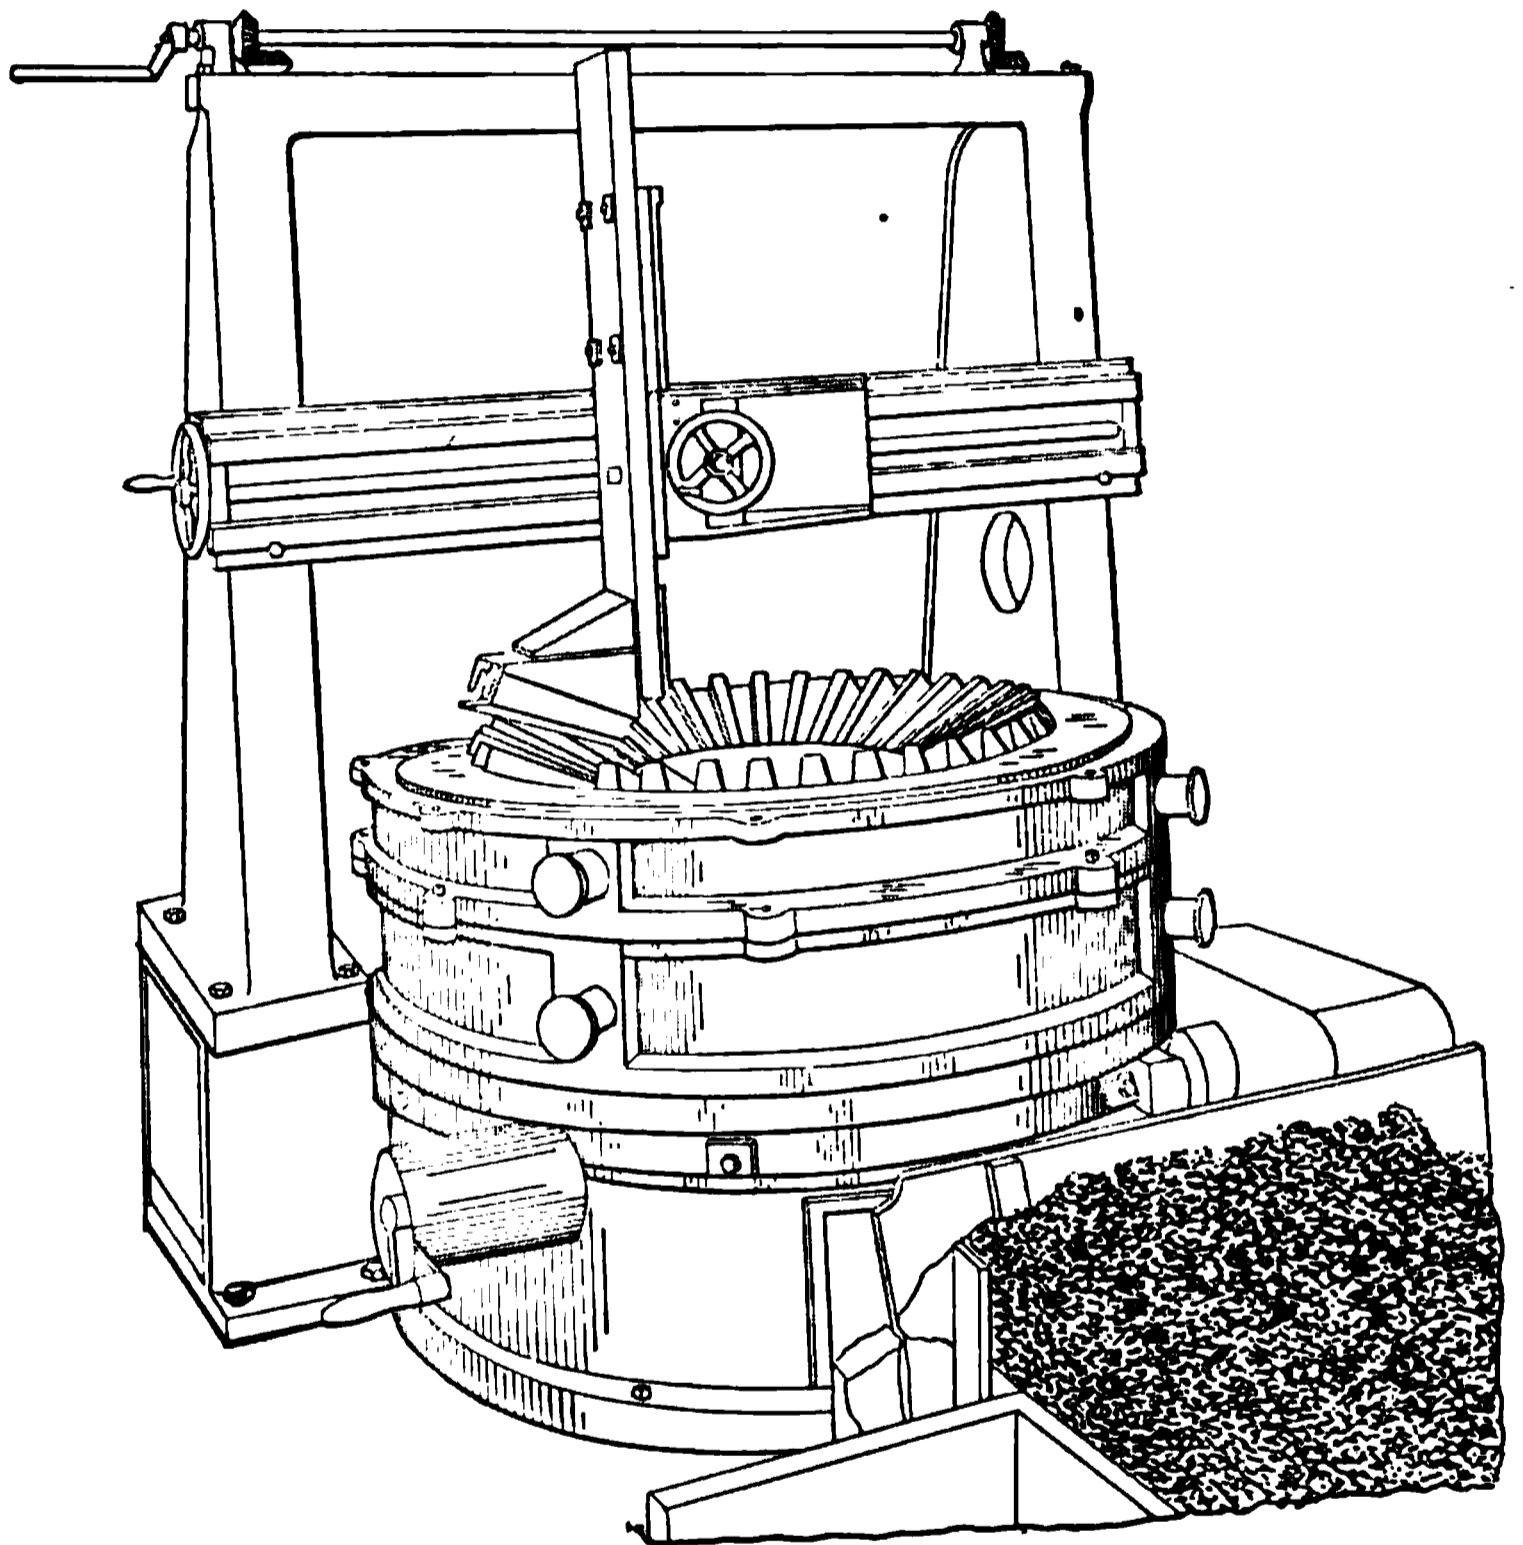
MACHINE FOR FORMING THE TEETH OF A BEVEL-GEAR.
